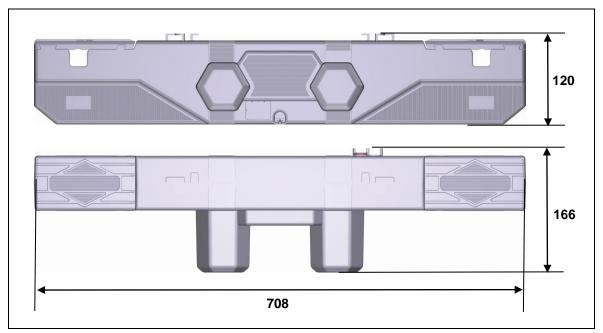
Dimensions of DUOMAT 3 drive (in mm)
